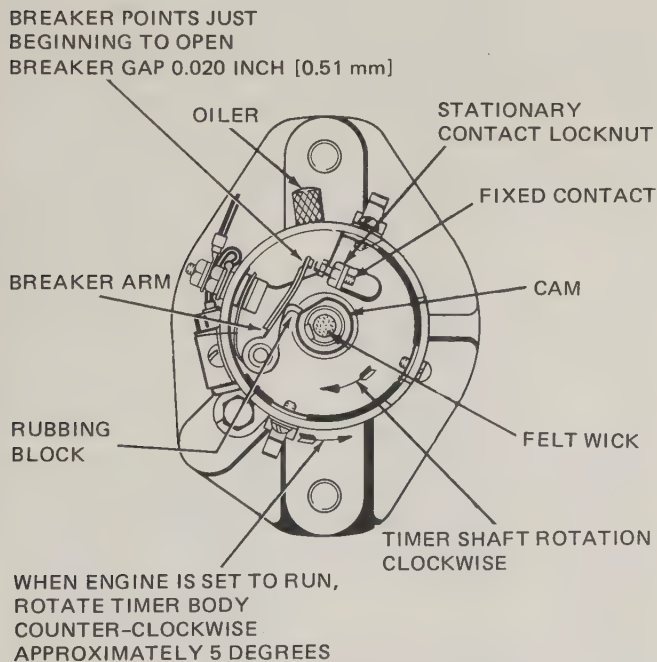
The cam in this timer has one flat spot to open the points and provide ignition for a one-cylinder four-cycle engine. (Wisconsin Motor Corporation)
